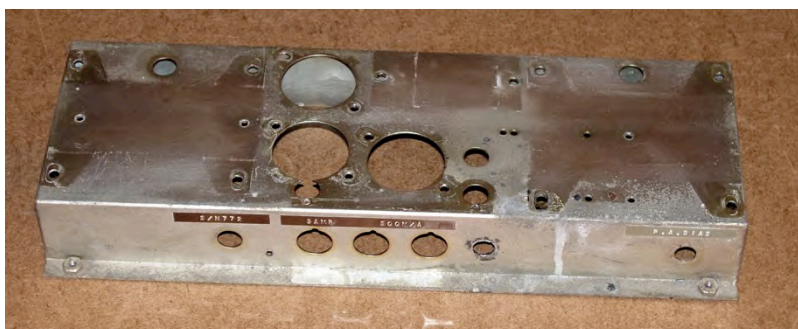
Power supply chassis stripped down completely, before bead-blasting.
